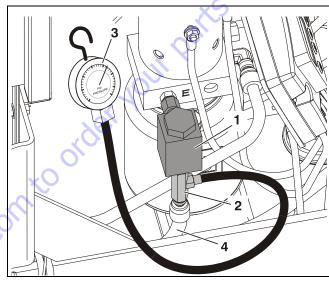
Typical Hydraulic Pressure Gauge Installation
